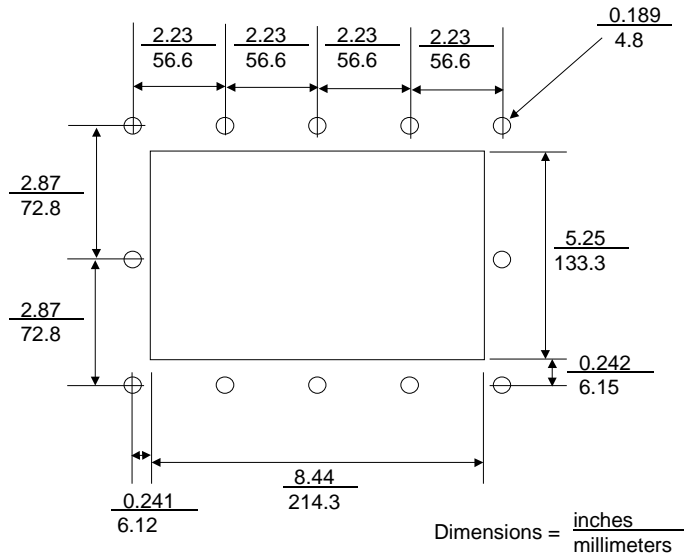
Cutout Dimensions for Operator Interface DIN Panel Mounting, Type 4X, Model 552
